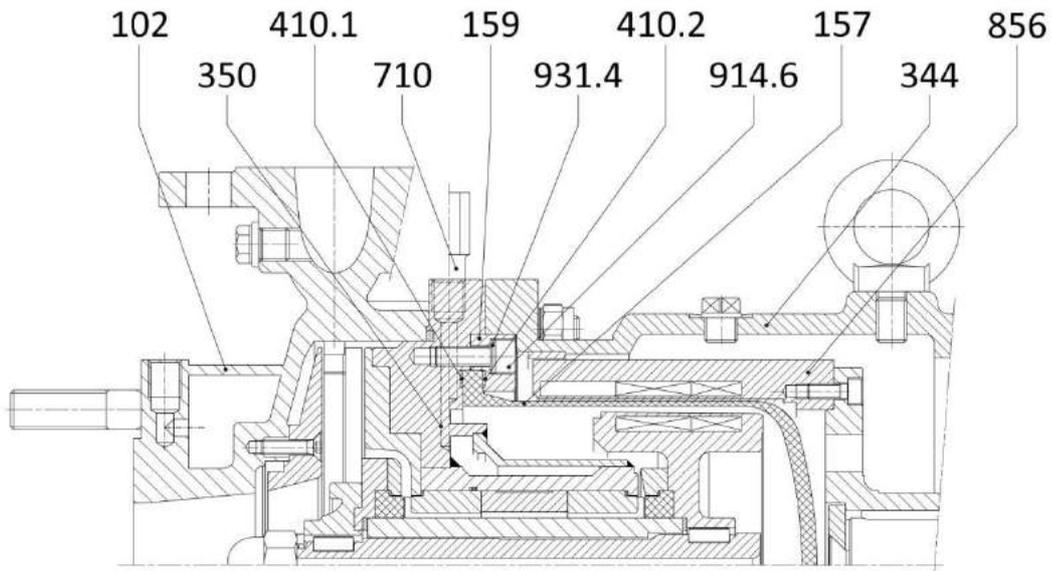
Typical section of XTS-B with casing and heated bearings, temp. probe kit, special lantern, zirconium oxide isolation shell.
